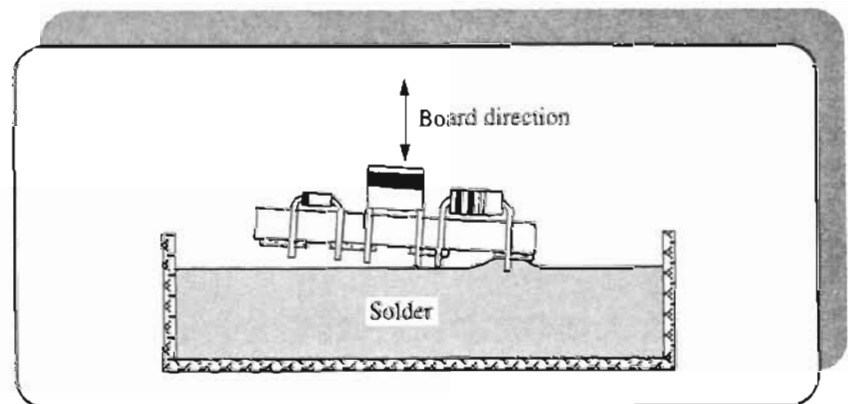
A simple form of dip soldering — lowering and removing the printed circuit board near-horizontally
